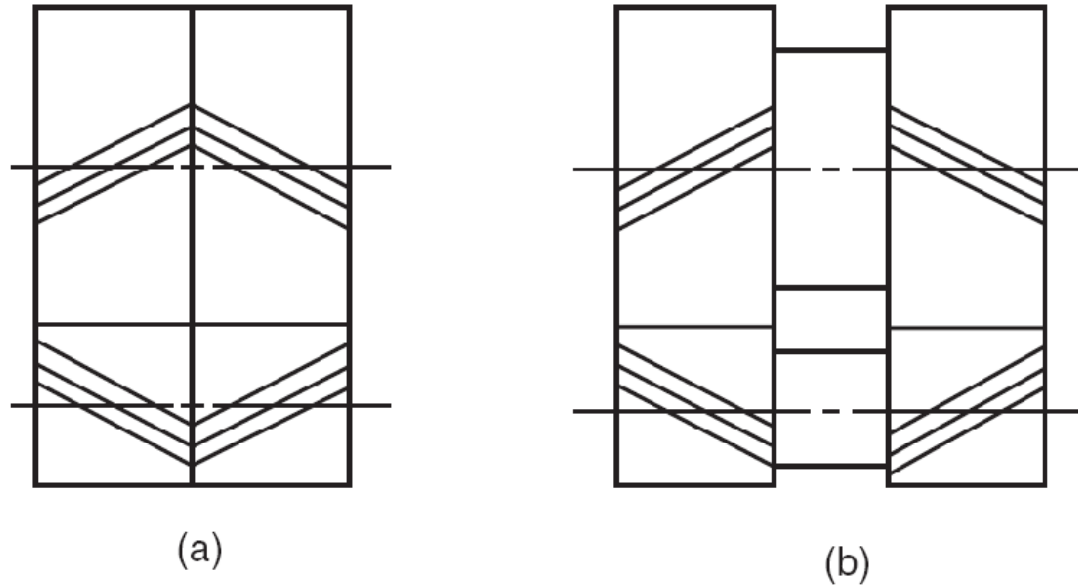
Double helical gears. (a) On same wheel (b) On separate wheels
